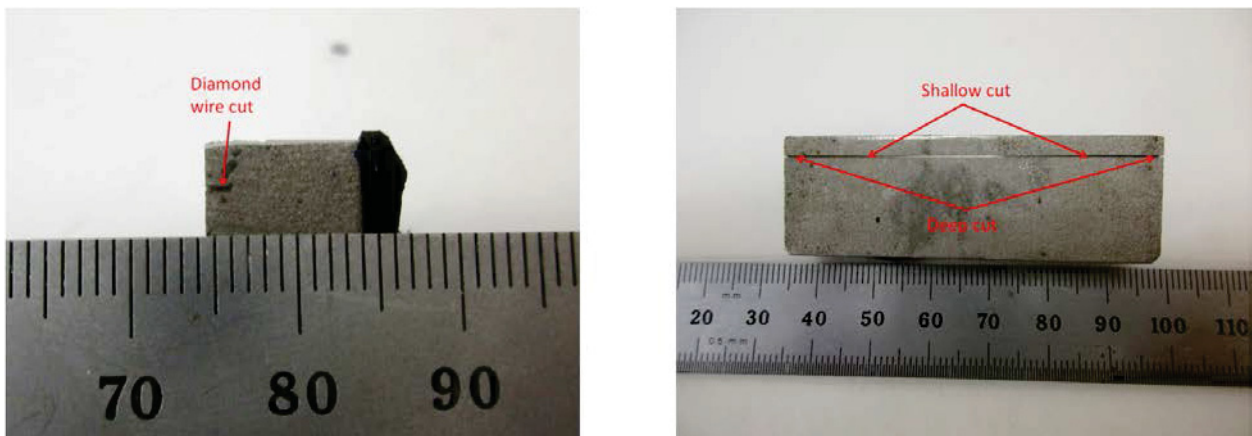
Cut specimen side view (L), Cut specimen top view (R)
